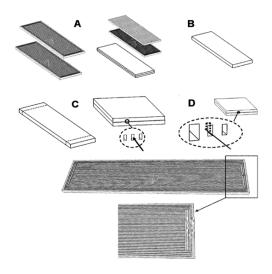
Process sequence: A) machining of grooves into surface, b) positioning of plates onto each other and joining, c) removing of face sides to access pilot holes, d) wire cutting.
